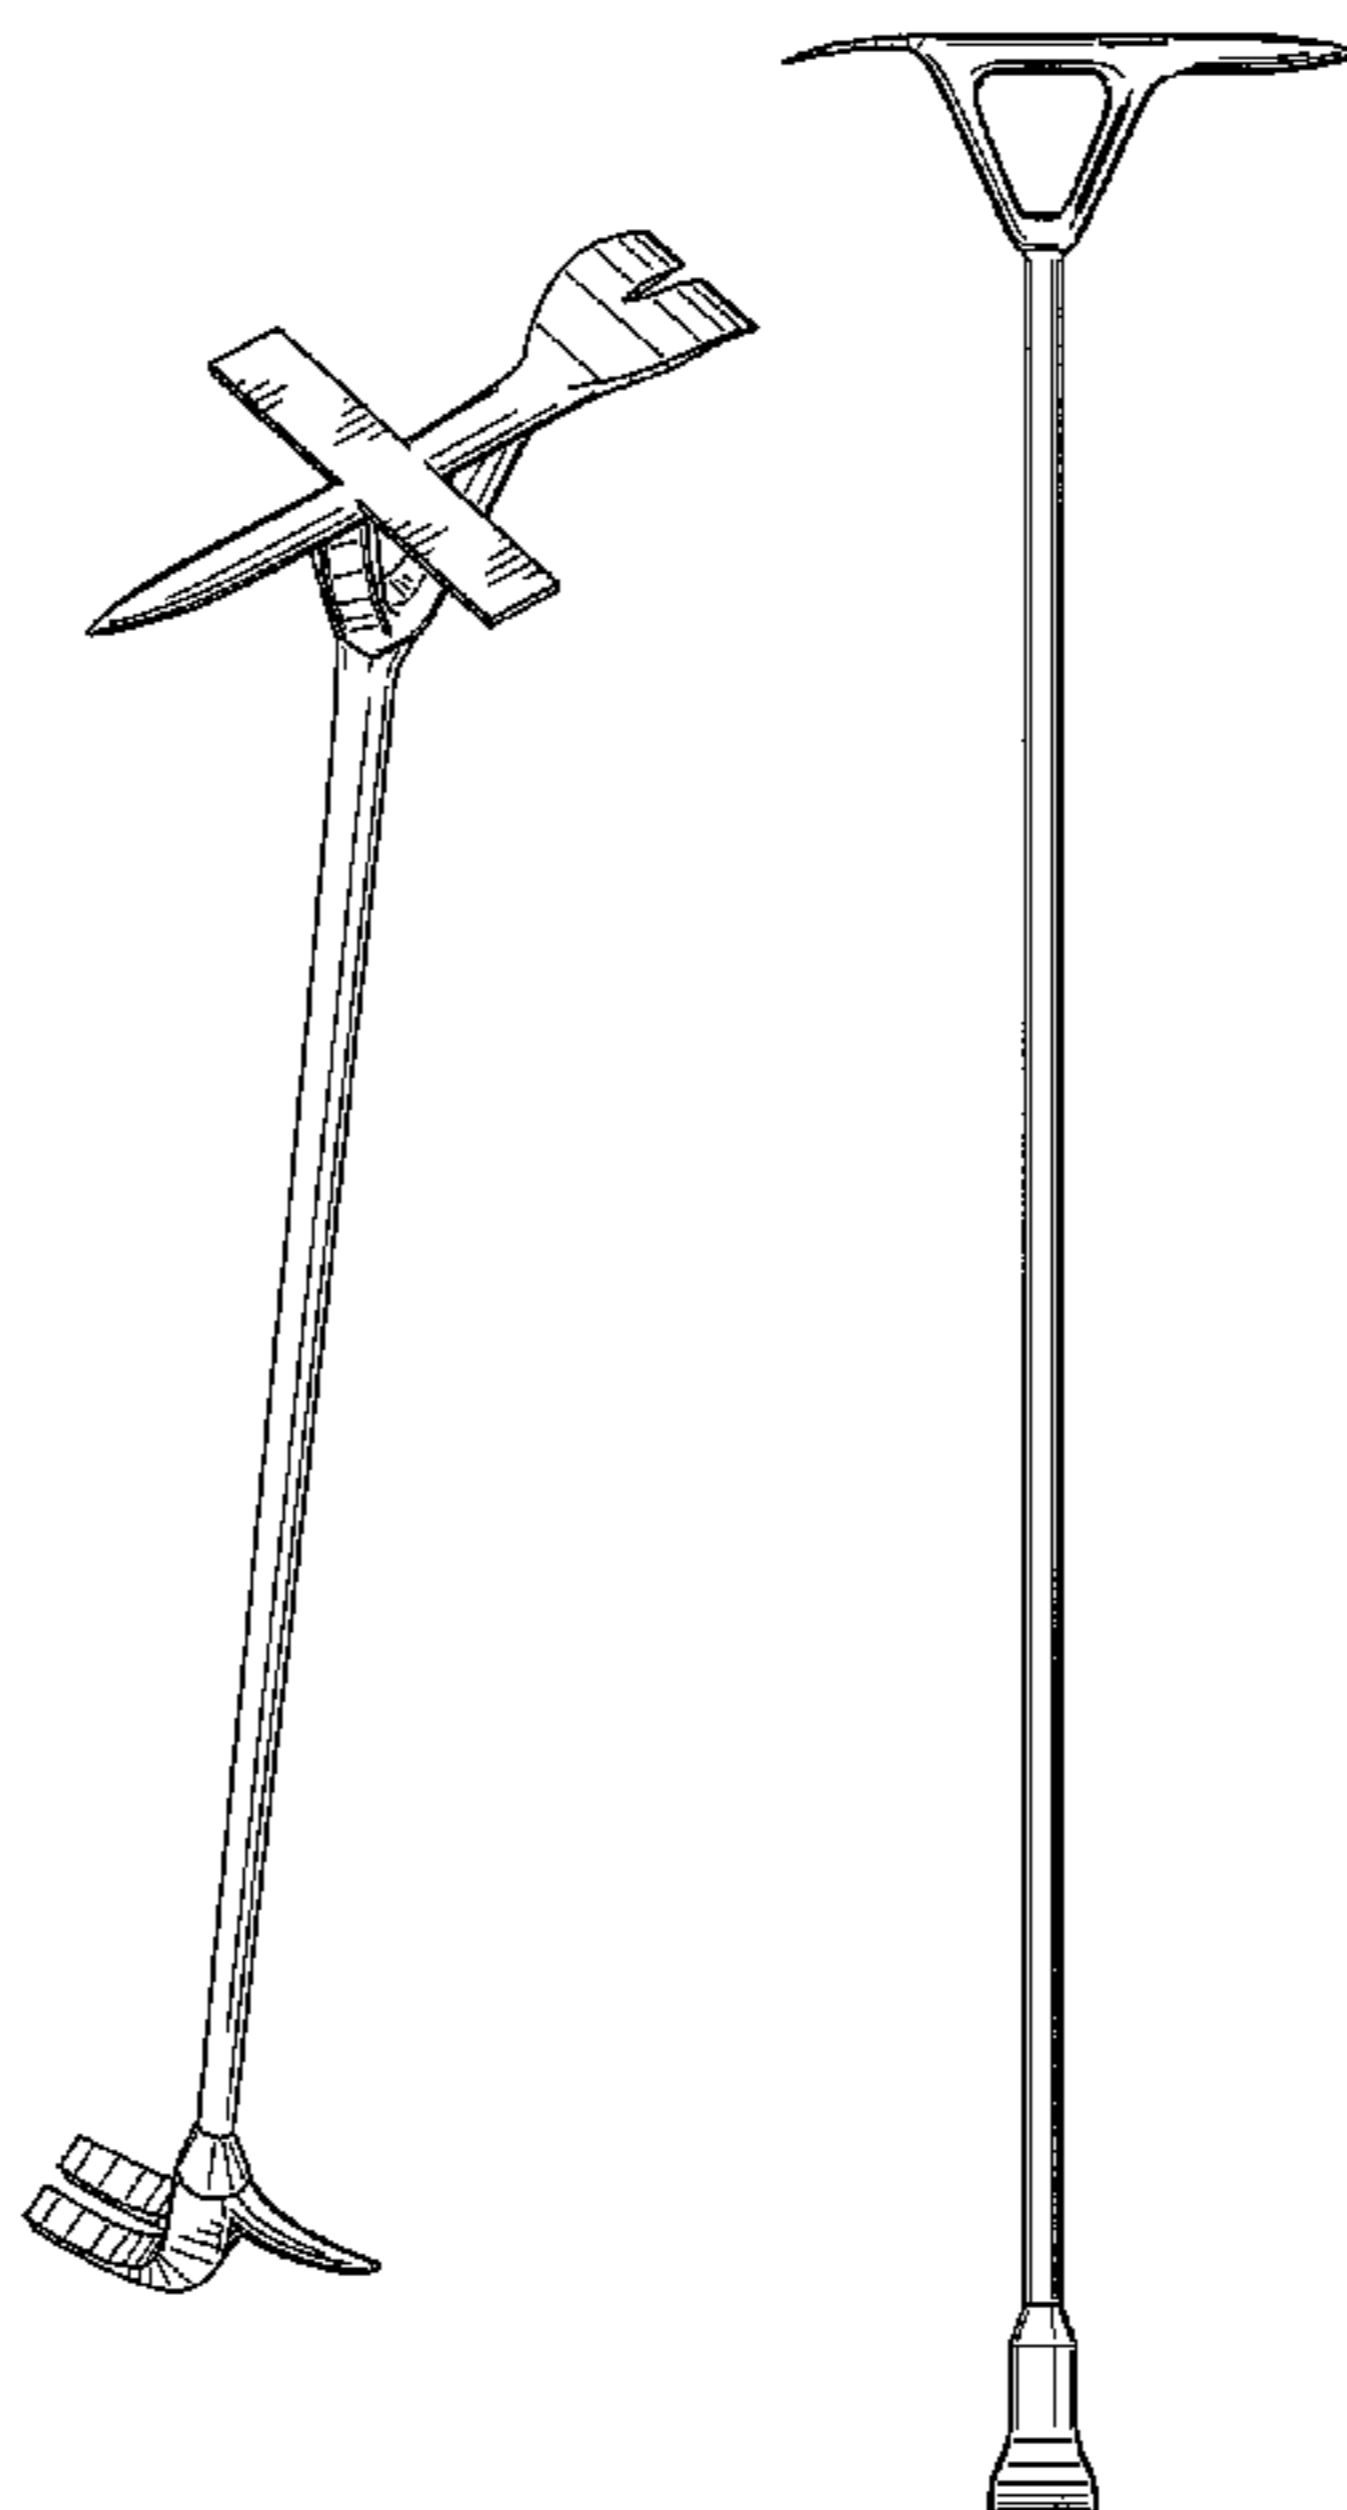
is an elevation view of the multi-purpose firefighting tool of the present invention.
